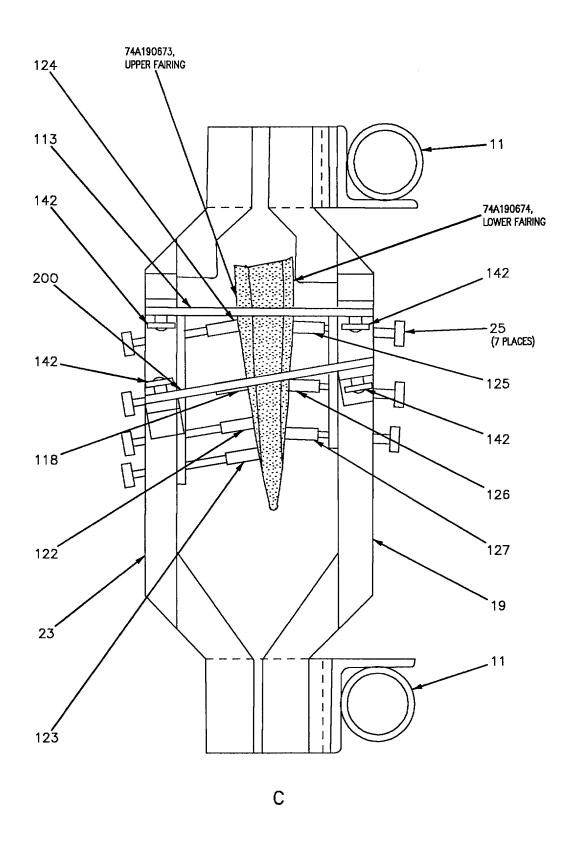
Installation of Upper and Lower Fairings (Sheet 3)
